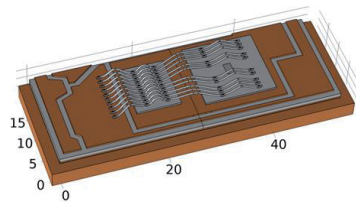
CAD figure showing one section of a module. The section consists of one IGBT chip, one diode chip and 10 bond wires.
